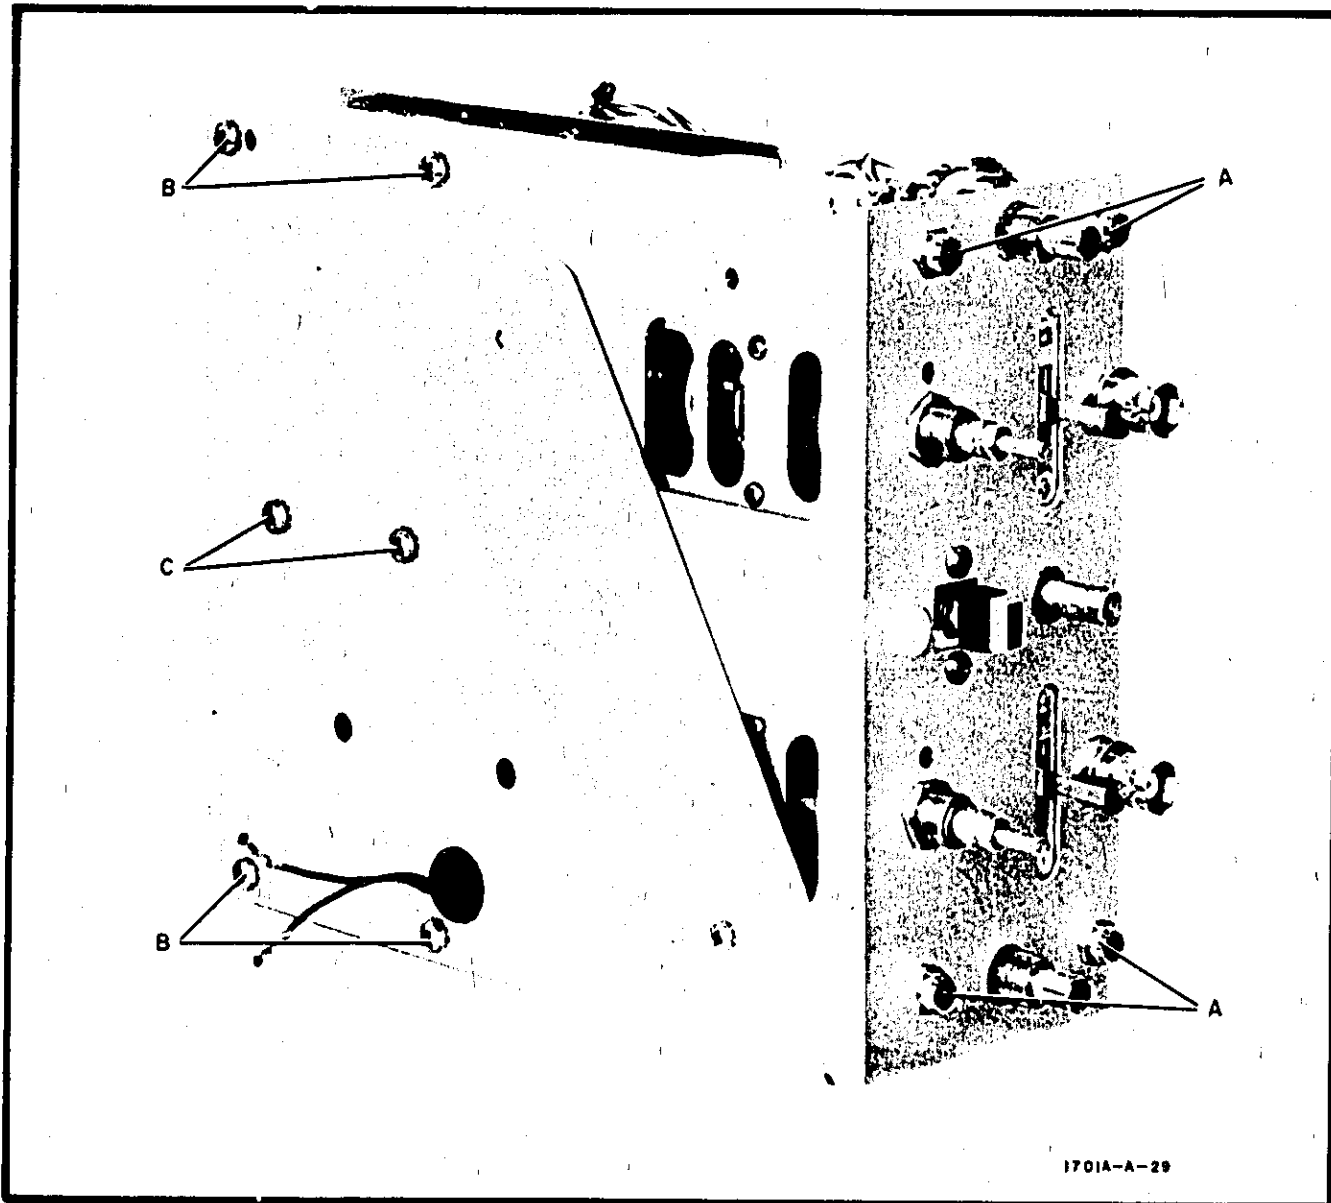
Vertical Amplifier Module Mechanical Parts Removal
